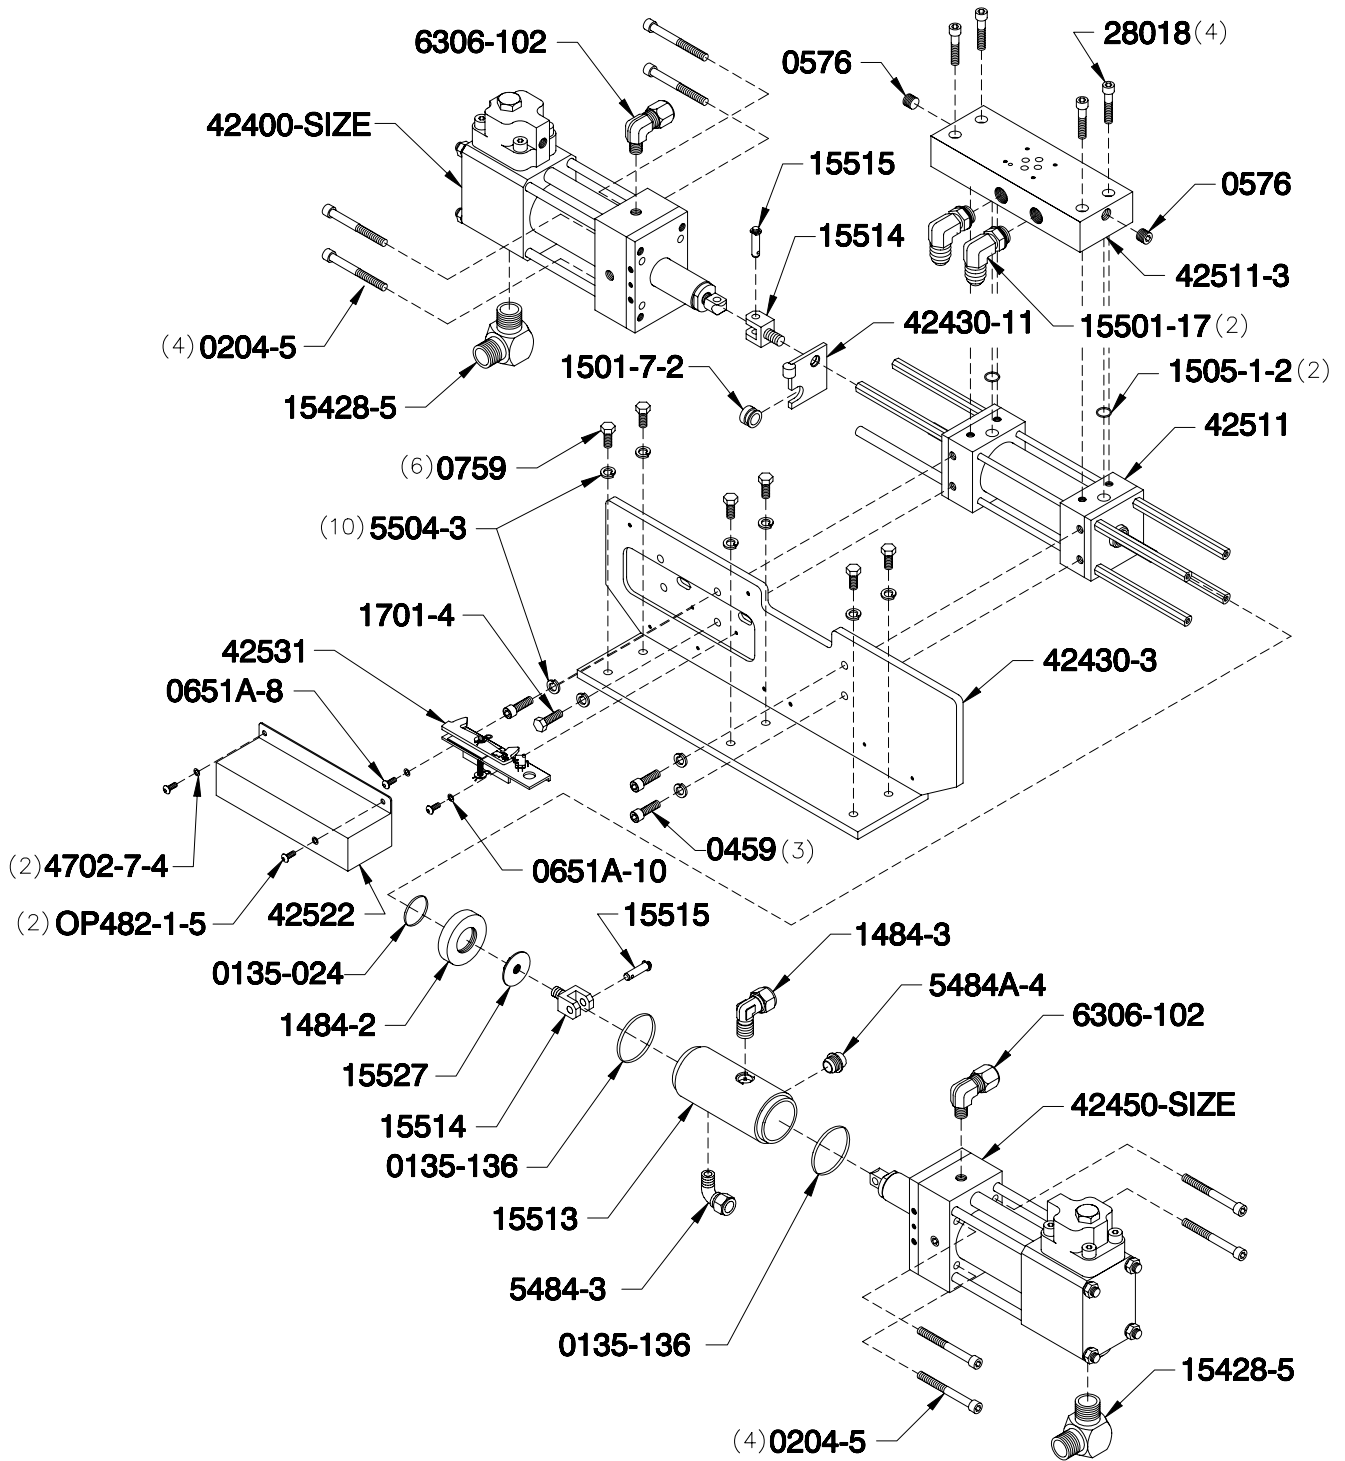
Pumpline Assembly (Part No. 42430-SIZE), Exploded View
